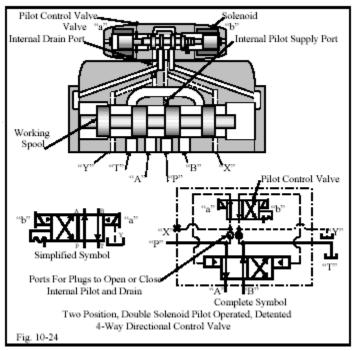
has a cutaway view and symbol for a detented, solenoid pilot-operated directional control valve. The only difference between this valve and symbol and those in *Figure 10-23* is
